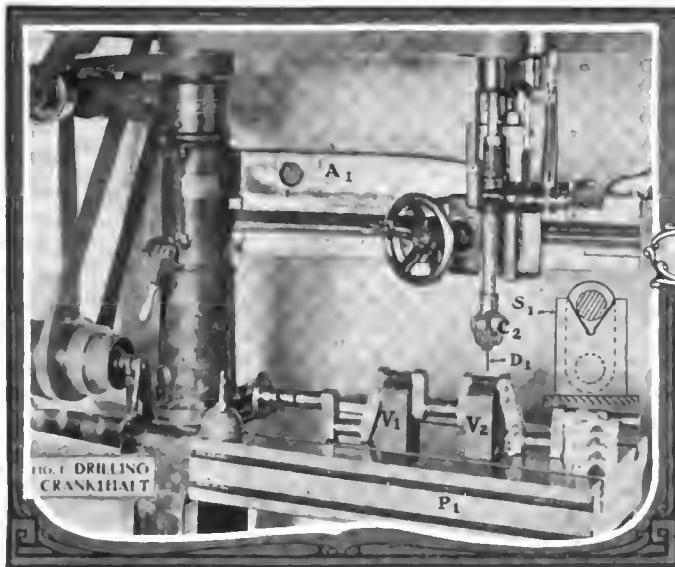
Method of drilling crankshafts, using a radial drill, V-blocks and a little skill
